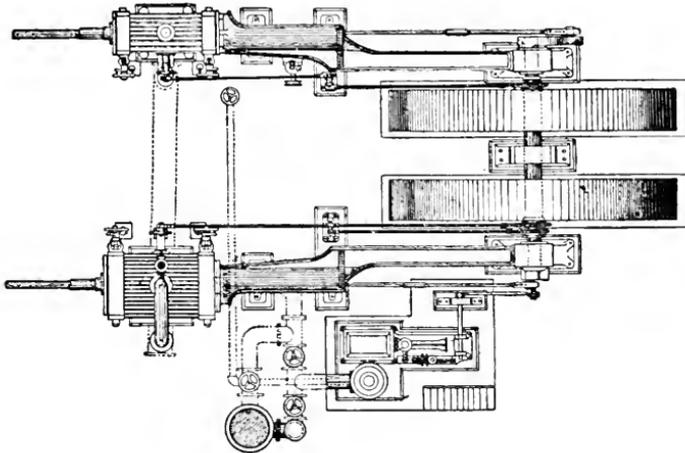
COMPOUND TWIN CORLISS ENGINE. WITH RECEIVER, CONDENSER, AND HEATER PLAN.
